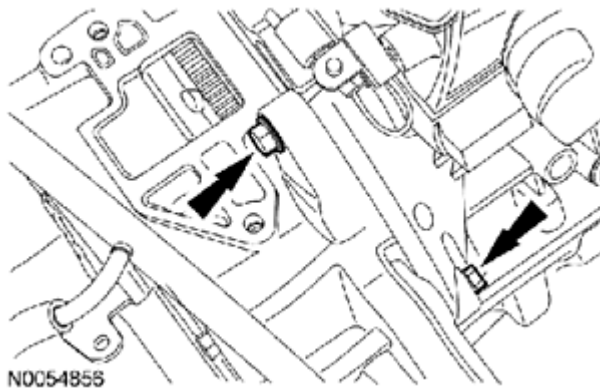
Locating Accessory Drive Belt Splash Shield And Bolts
